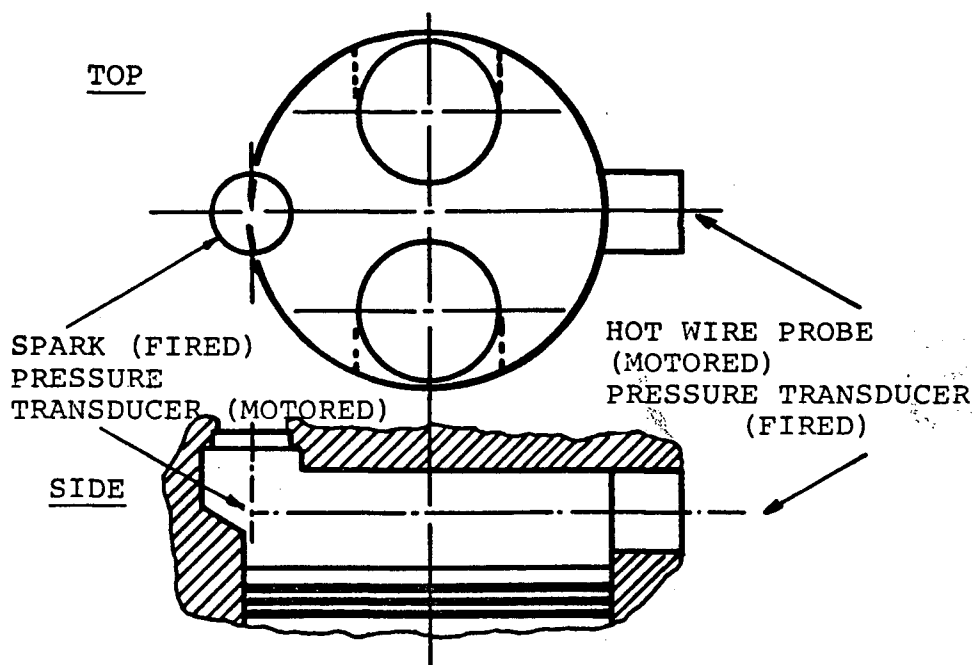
Top and side view of C.F.R. combustion chamber
